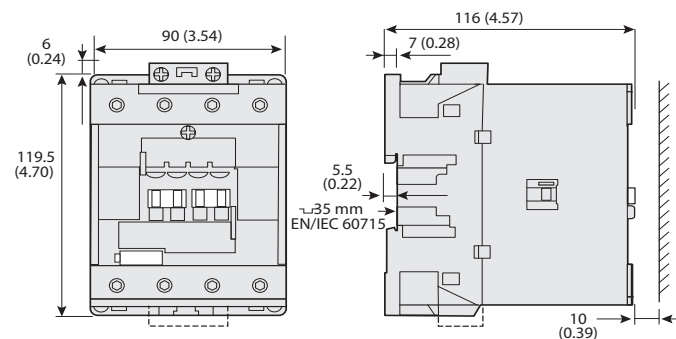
100-E80 4-Pole Contactors with Front-mounted Auxiliary Contact
